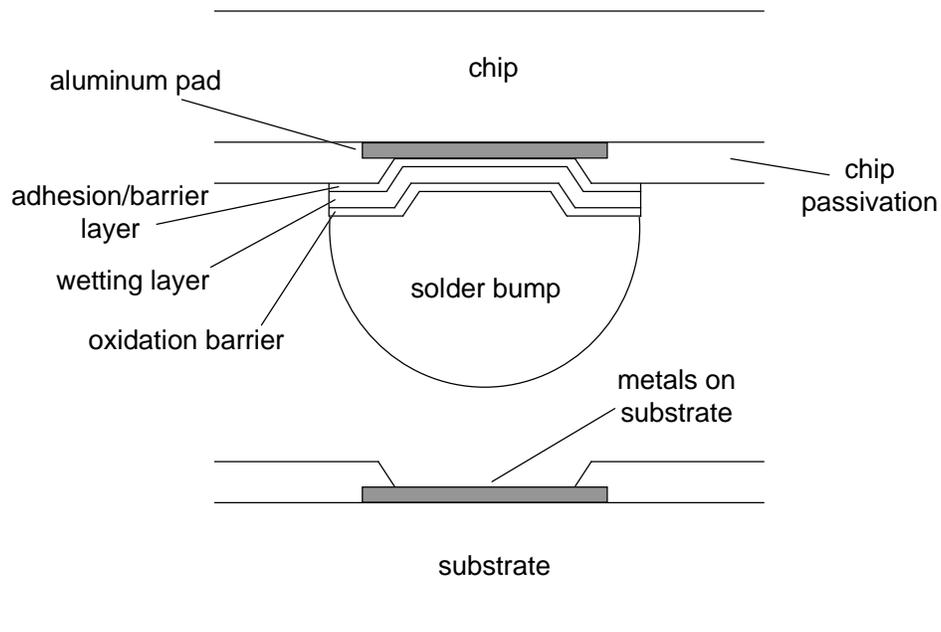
Illustration of typical solder bonding technique used in flip-chip electrical packaging of a silicon chip to a substrate.
